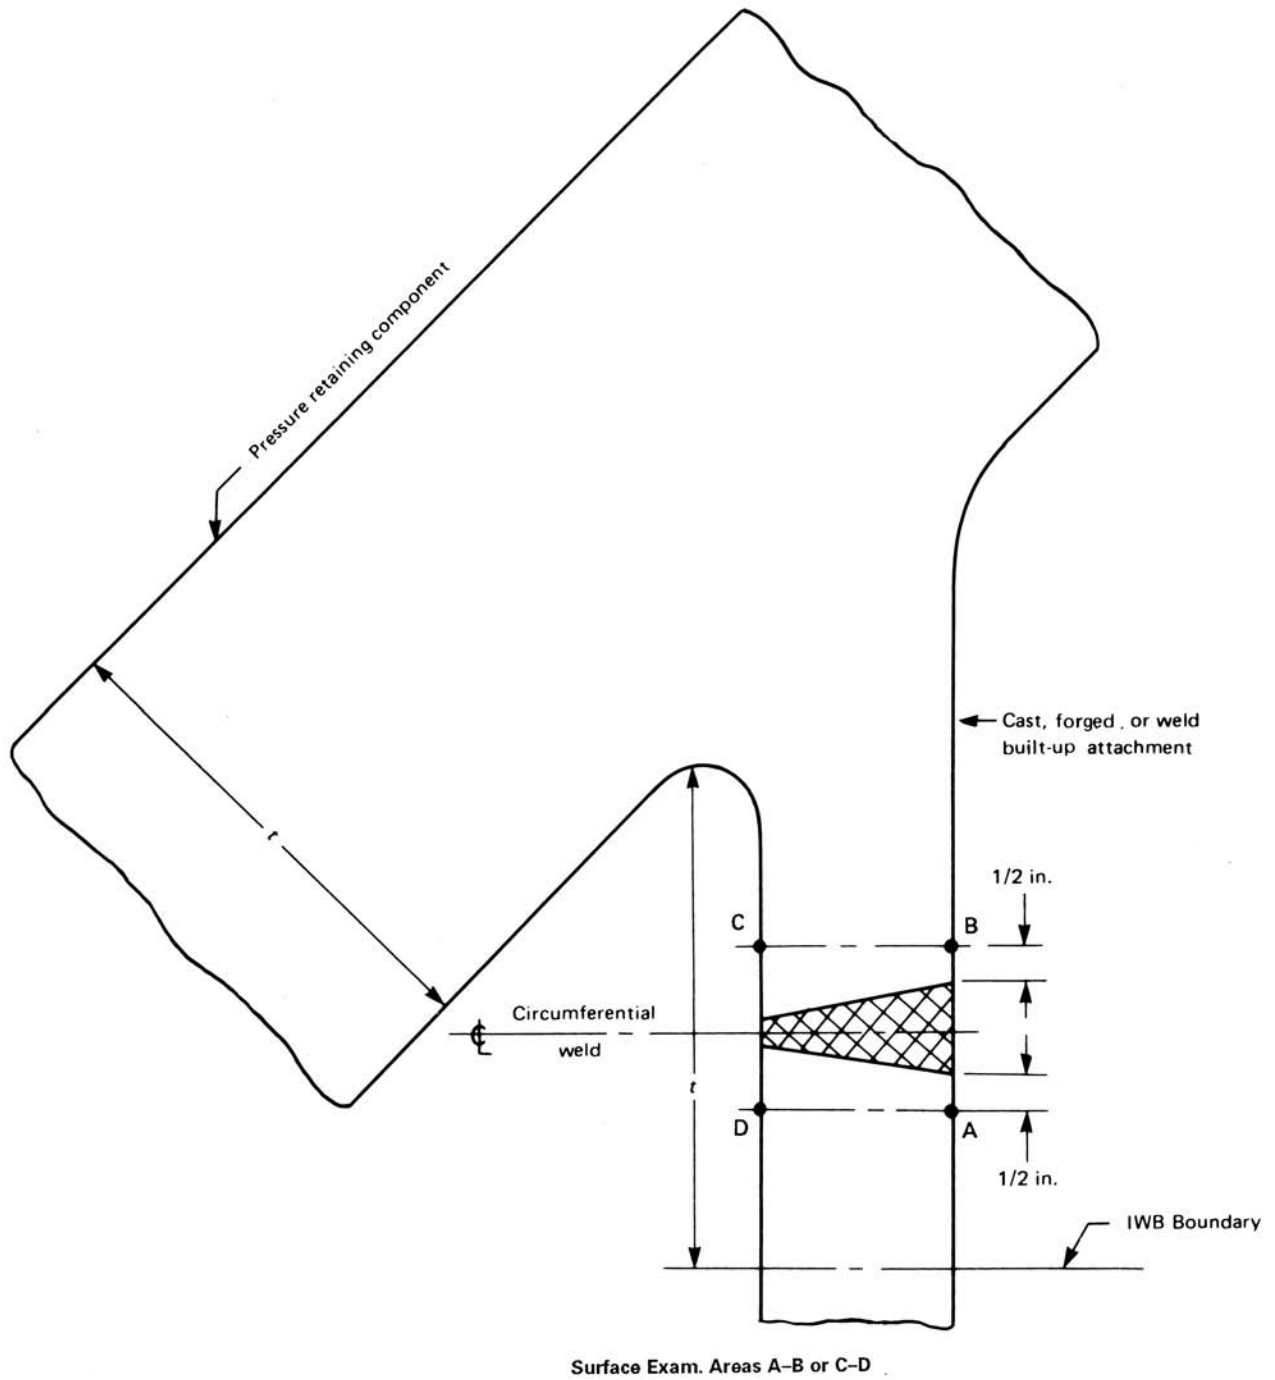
WELDED ATTACHMENT
